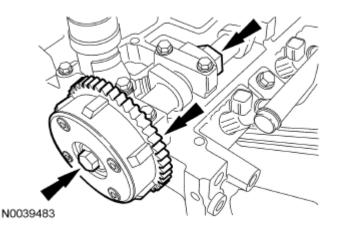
Locating Flats On Camshaft, Bolt And Camshaft Phaser And Sprocket Courtesy of FORD MOTOR CO.
